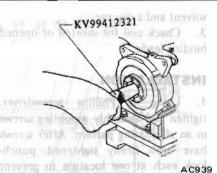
Inserting Shaft Seal Remover and Installer
